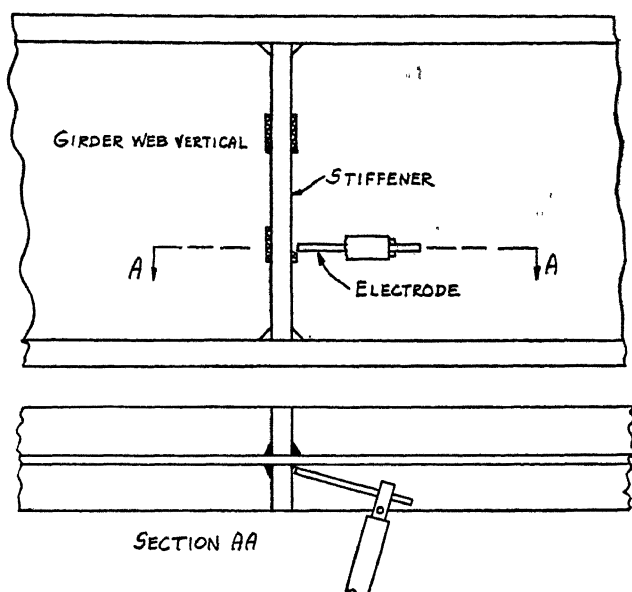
Position for welding thick stiffener to thin web.
